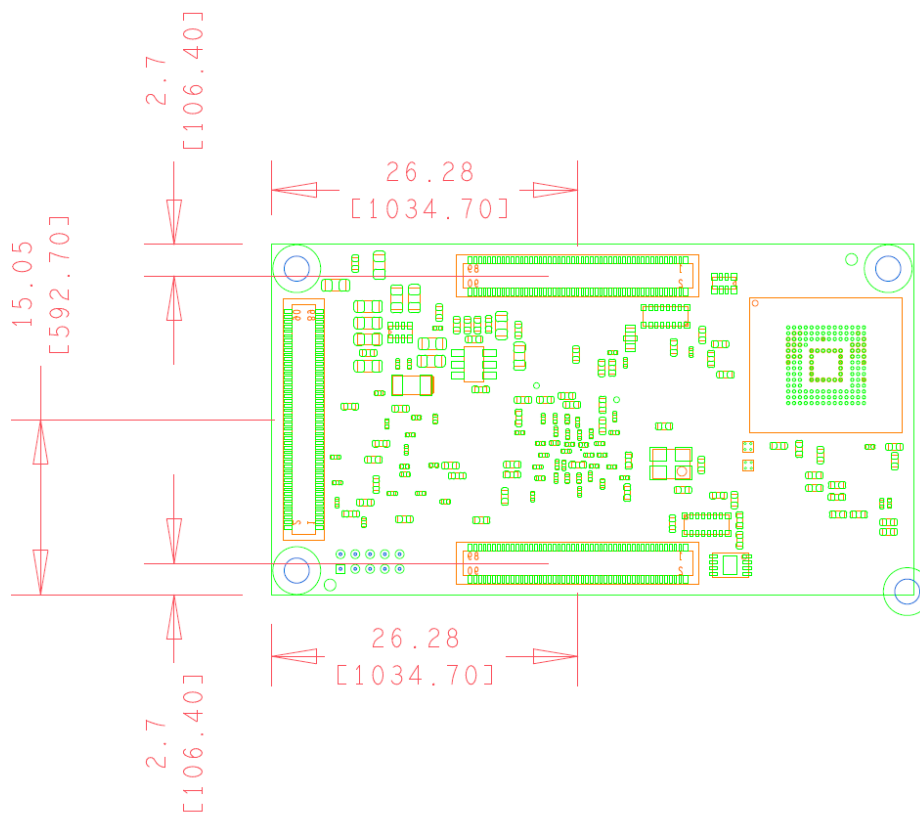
DART-MX91 Print Side Mechanics (Top view)
